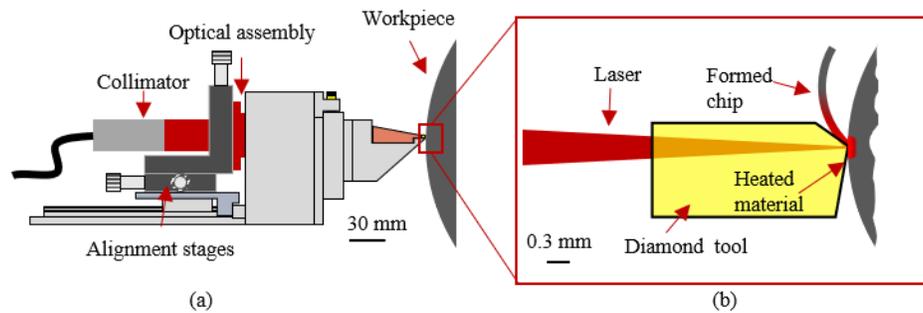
μ -LAM process; (a) Optimus T_{+1} tool post (b) schematics of the tool-workpiece-laser light interaction
